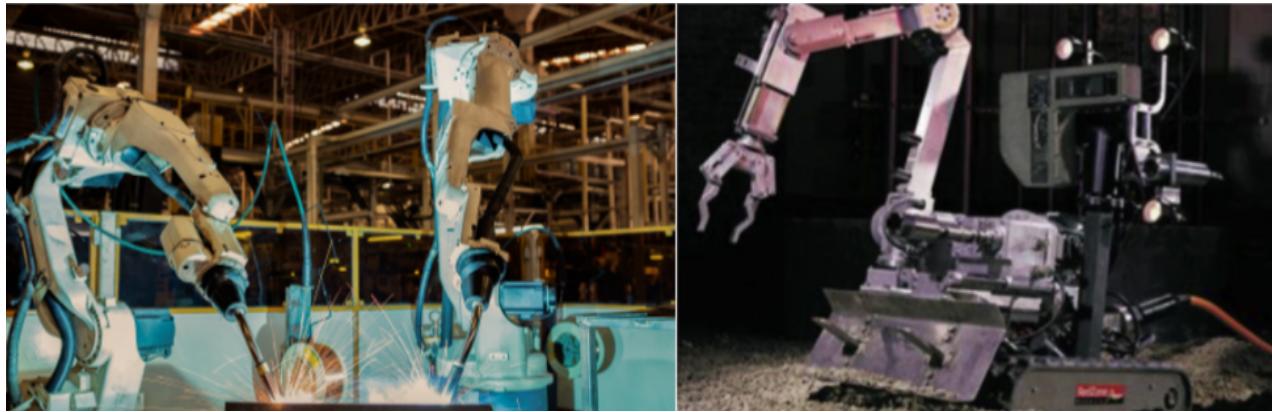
Robotic arm is used for welding in Industries and inspection at Nuclear Sites
